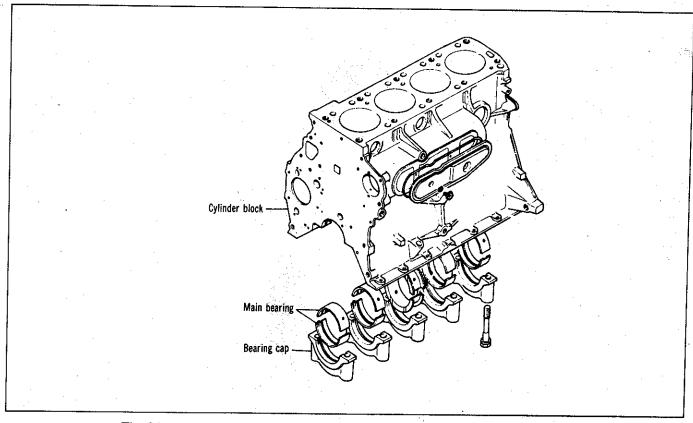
Early cylinder block (showing grooved lower bearing shells and caps)
